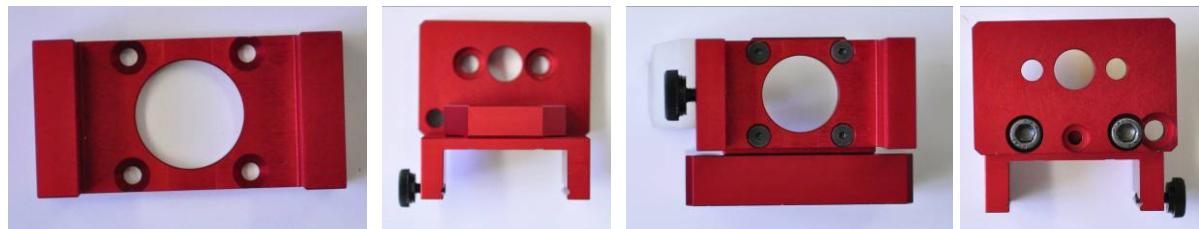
Camera holder (left) mounted on the adapter plate with the intermediate piece.
